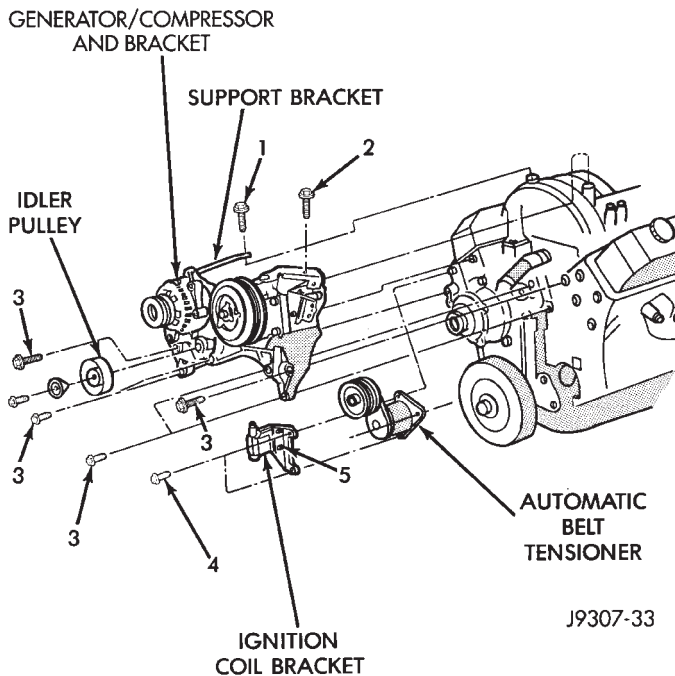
Generator and A/C Compressor Mounting Bracket—5.2L Engine
